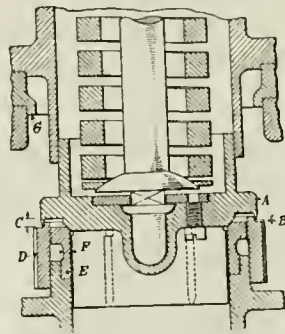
MODIFIED SAFETY VALVE OF TYPE 3.
